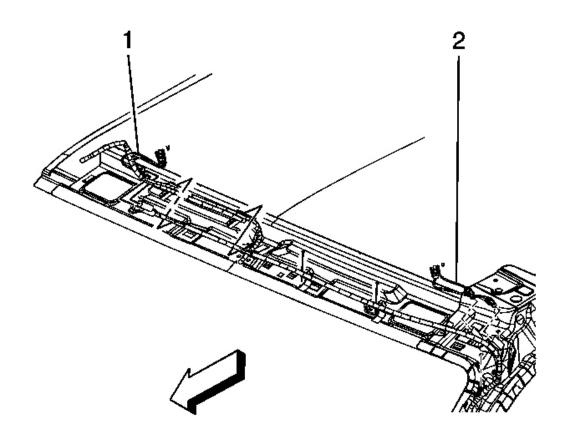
View Of Coax Cable & Digital Radio Connectors (UE1, U2K) Courtesy of GENERAL MOTORS CORP.
